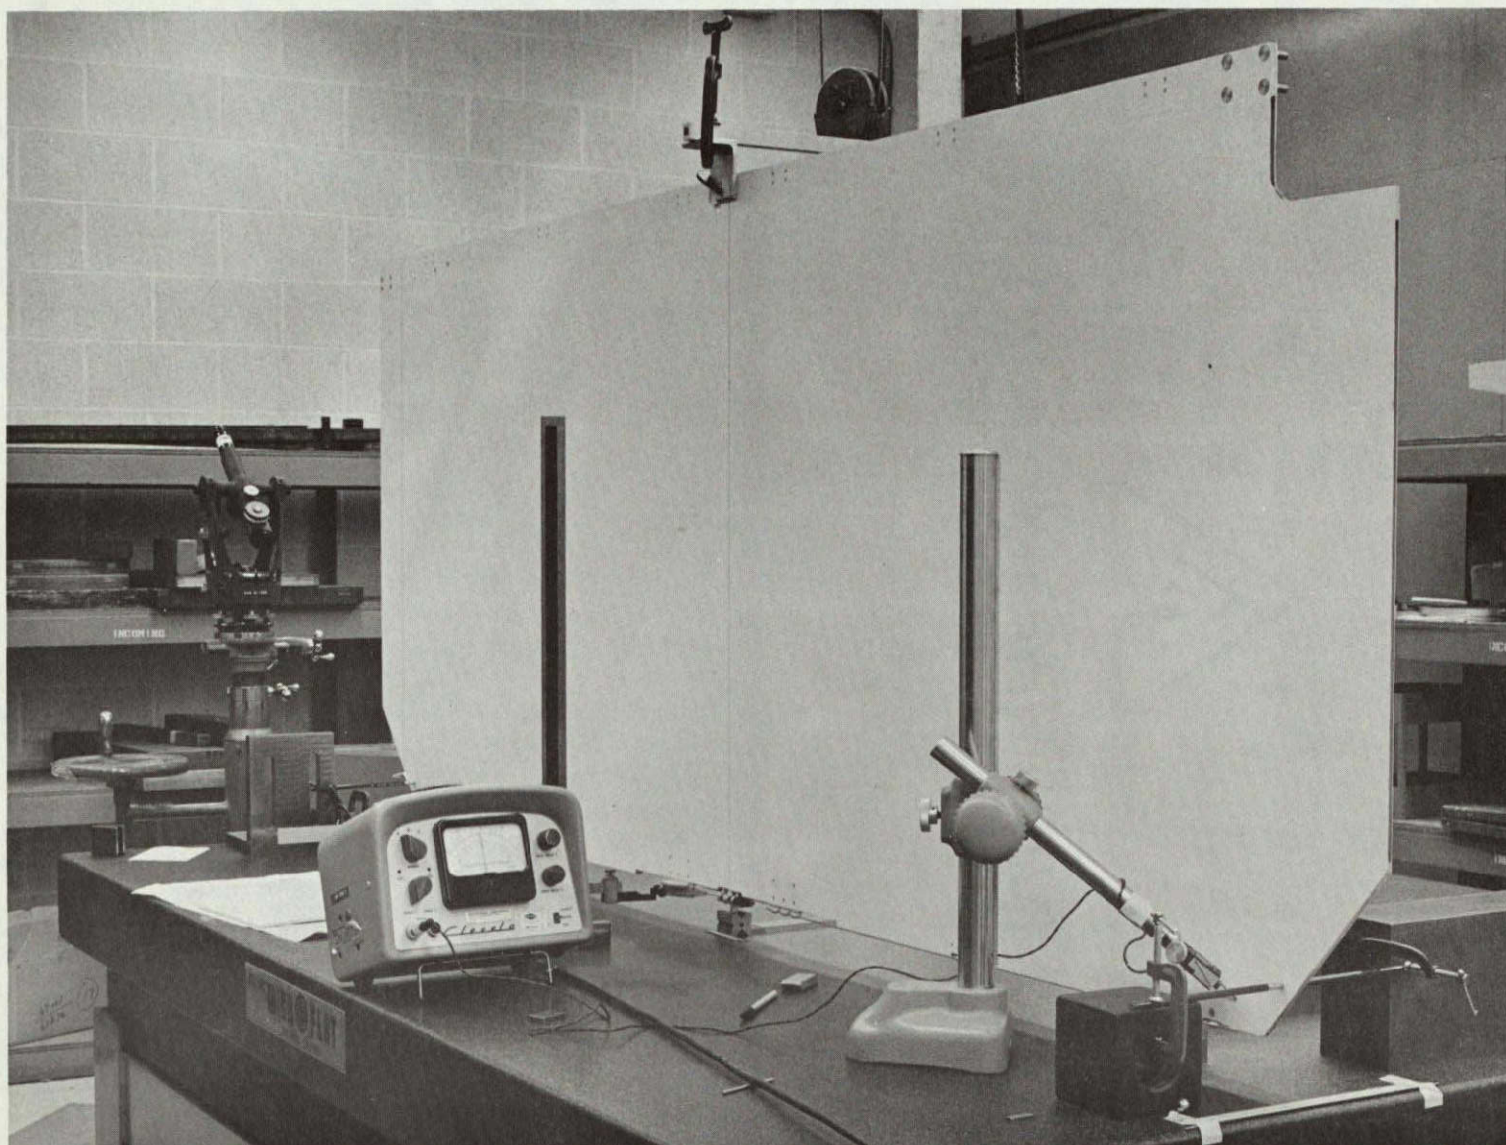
Holding Picture and Electronic Instrumentation, For Dimensional Check, Sun Side Shown
